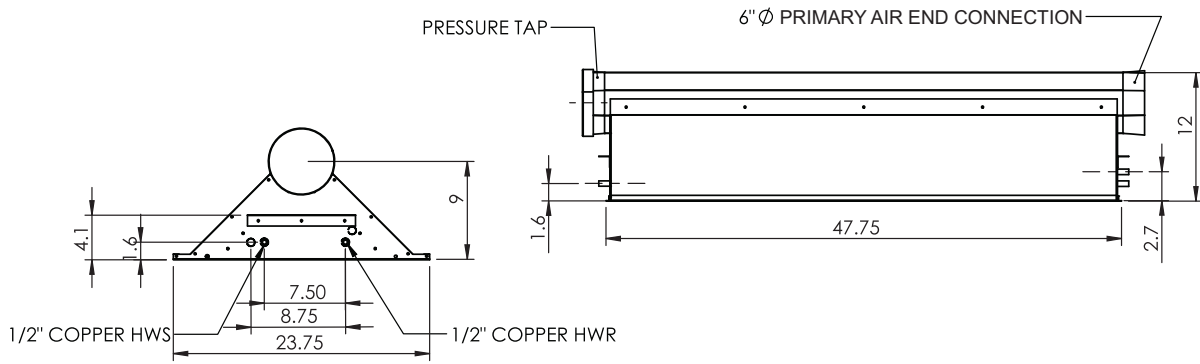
36CBAL, 2-Pipe, Size 06 Unit Dimensions
